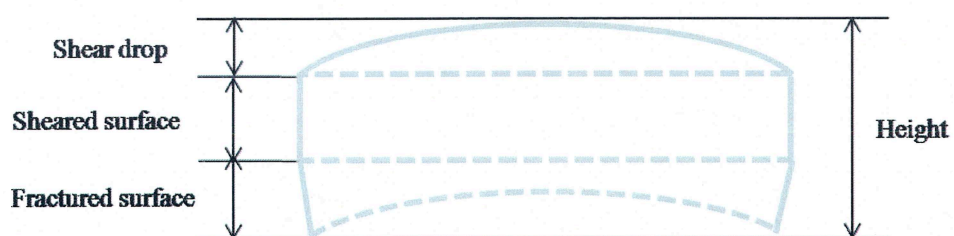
Schematic side view of punched disc and definitions of disc height, shear drop, sheared surface and fractured surface
